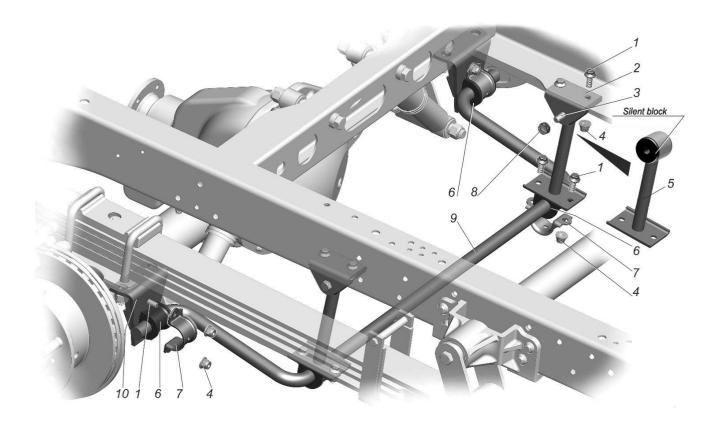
Rear suspension stabilizer installation: 1, 3 – bolts; 2 – upper stabilizer bracket; 4, 8 – nuts; 5 – pivoted bench; 6 – pad; 7 – saddle clip; 9 – bar; 10 – lower stabilizer bracket
